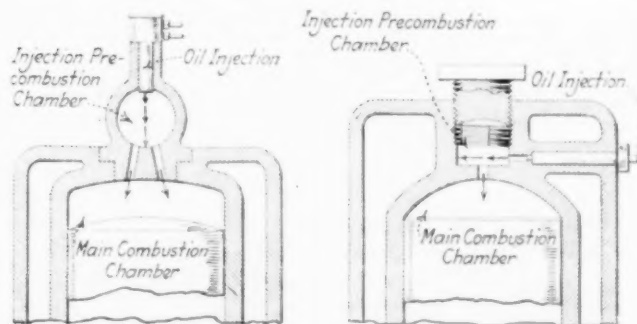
NYDAHL DIVIDED COLD COMBUSTION CHAMBER
